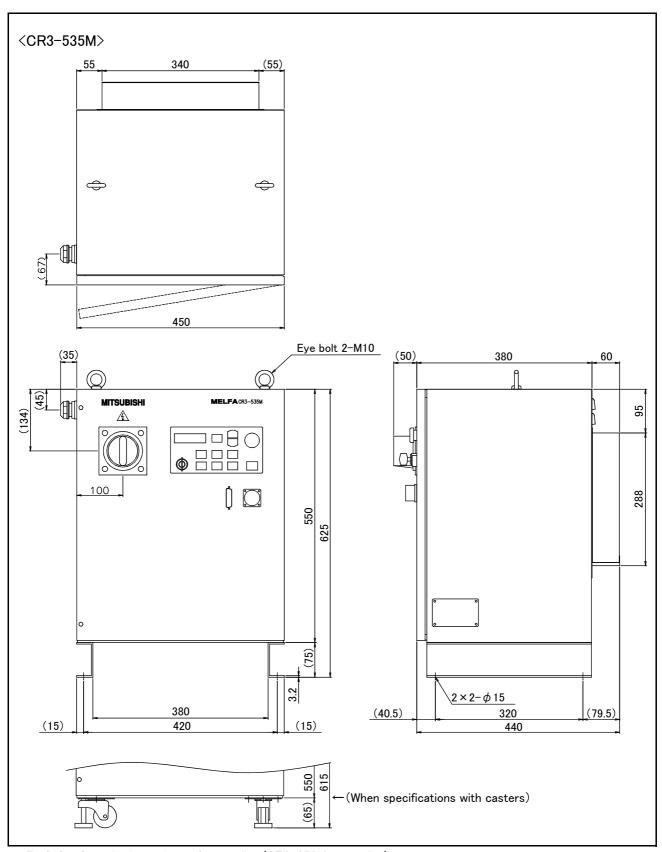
Outside dimensions of controller (CR3-353M controller)
